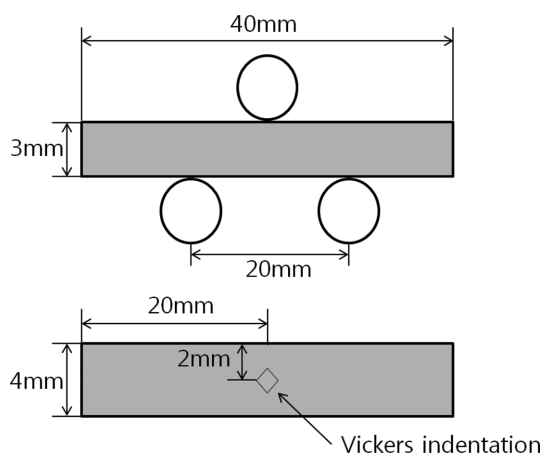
Schematic drawing of hot-pressed SiC specimen.
